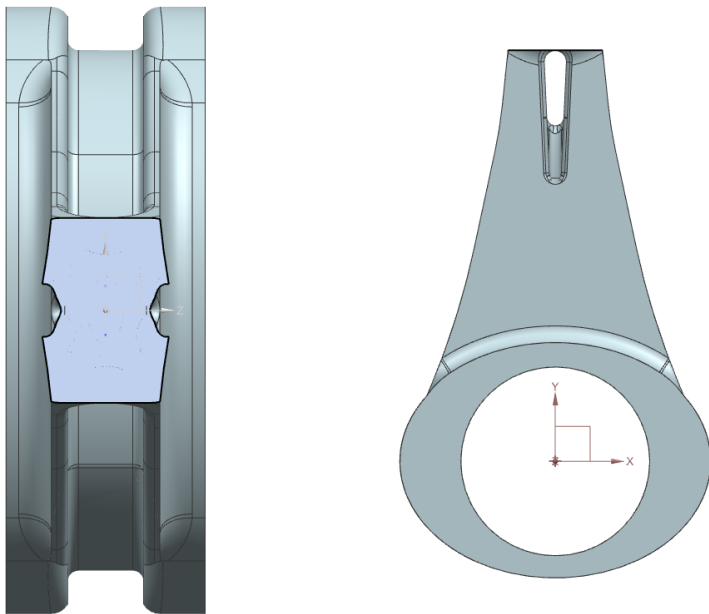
Cross-section of 2.1 beam; top beam section.
